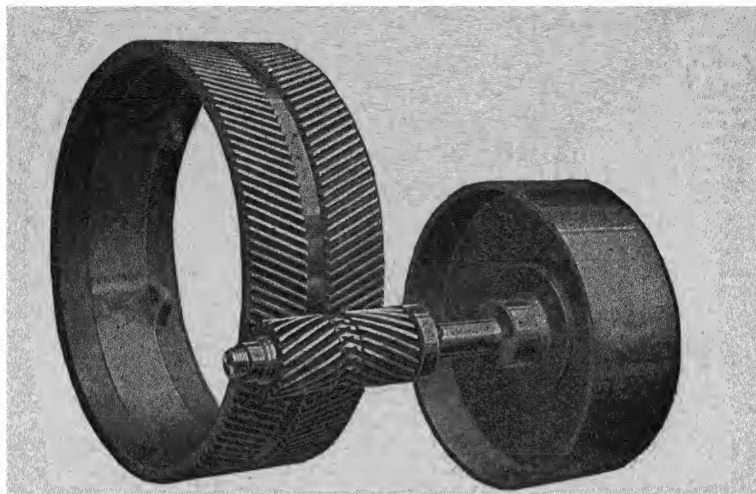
Helical Gear Rim, Pinion, and Brake Pulley
